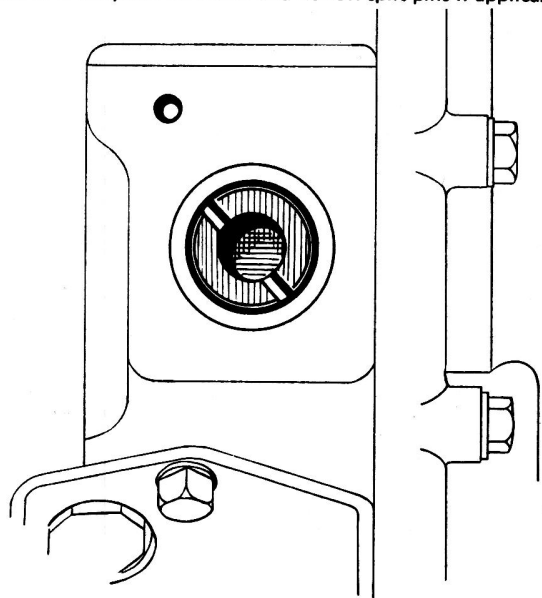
Position of the distributor drive offset when No.6 piston is at T.D.C.
